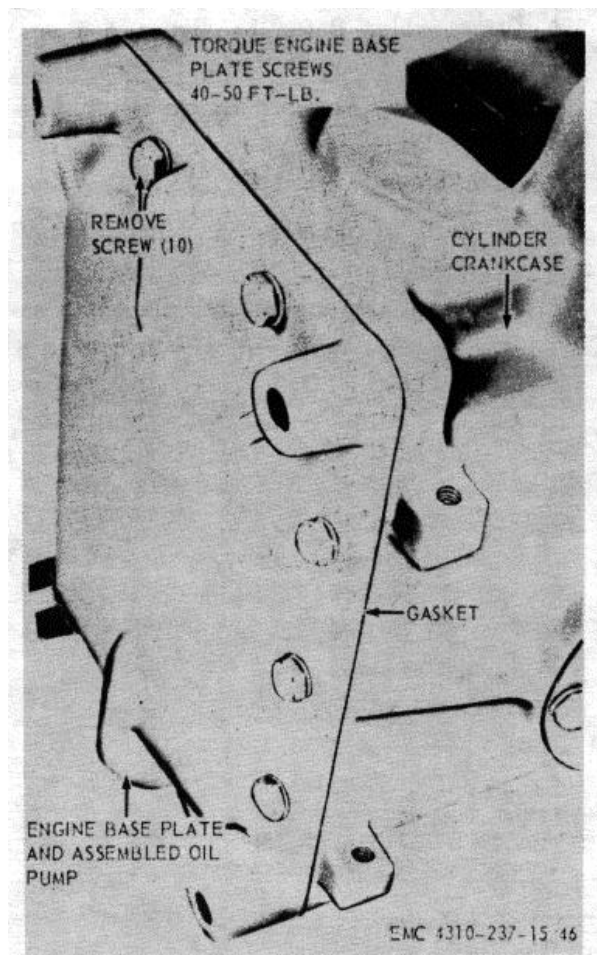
Engine base plate and assembled oil pump, removal and installation
